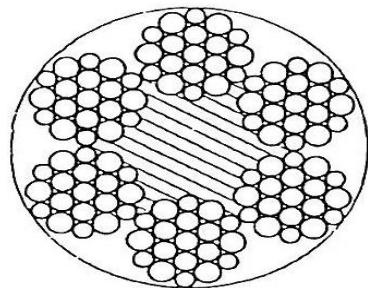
6 × 19 SUSPENSION ROPE, WARRINGTON-TYPE STRAND
